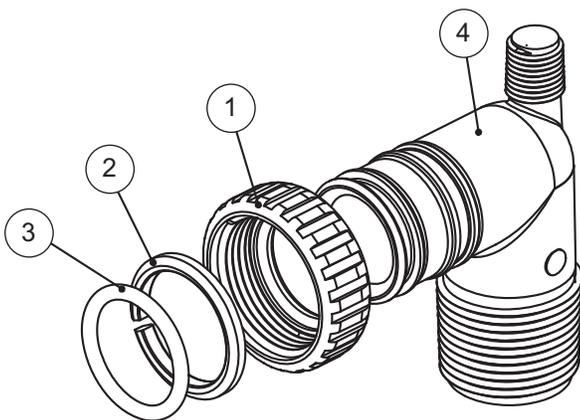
1" PVC Male NPT Elbow Assembly - CV3007
